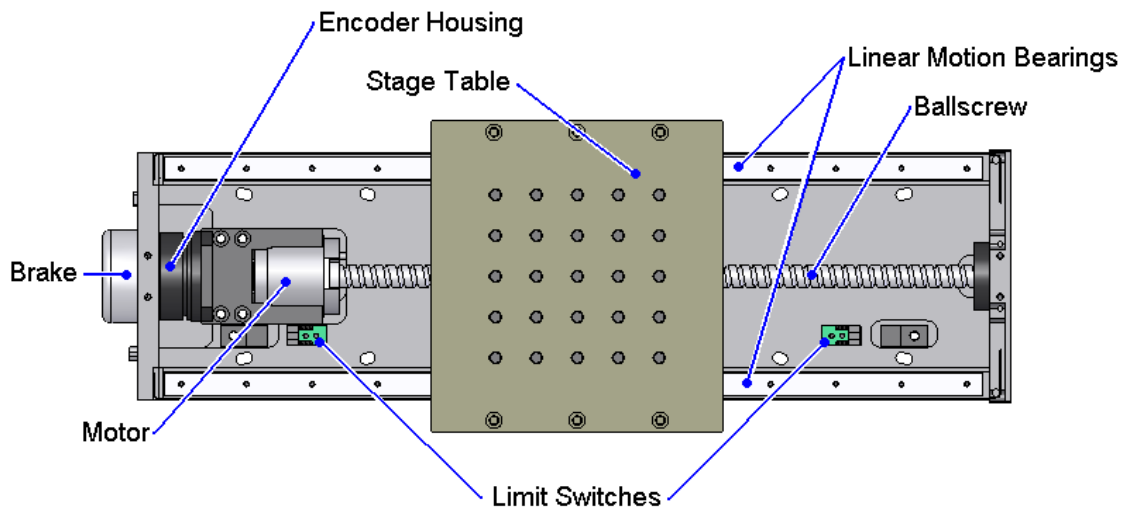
Internal View of Stage Showing Ballscrew and Linear Bearings
